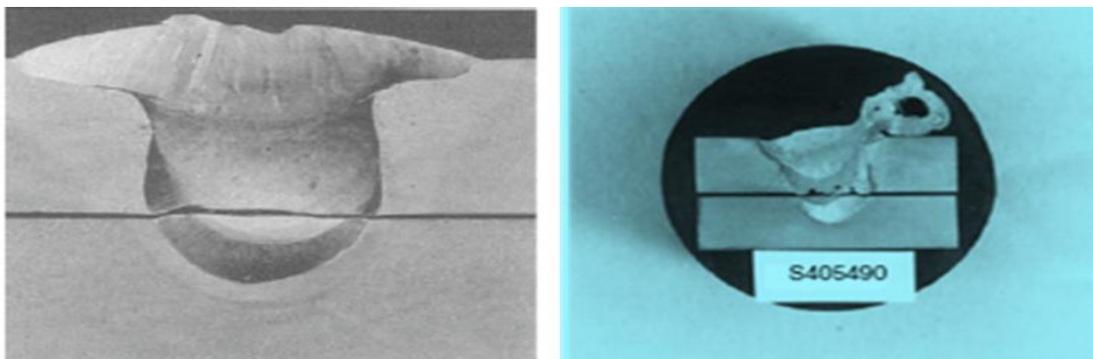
Macro-photograph for welds D1 (left) and W1 (right) conducted by Welder B [11].
